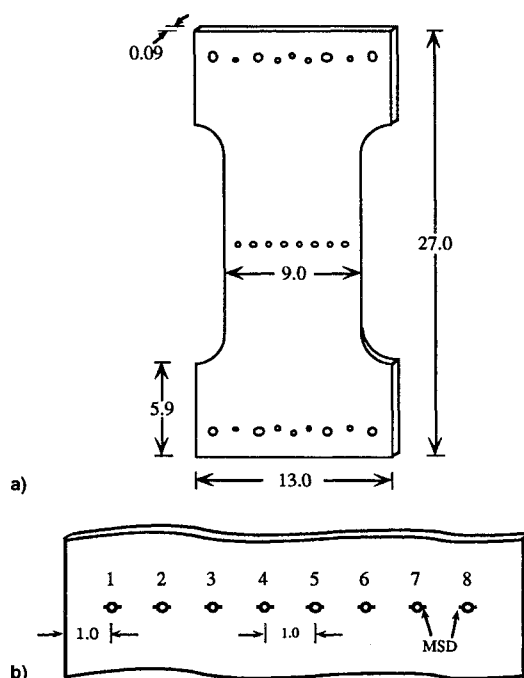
Typical MSD specimen (MSD04) with nominal 0.16-in. hole diameter: a) global specimen configuration (dimensions in inches) and b) detailed view of crack plane showing hole spacing and MSD crack locations (dimensions in inches).
